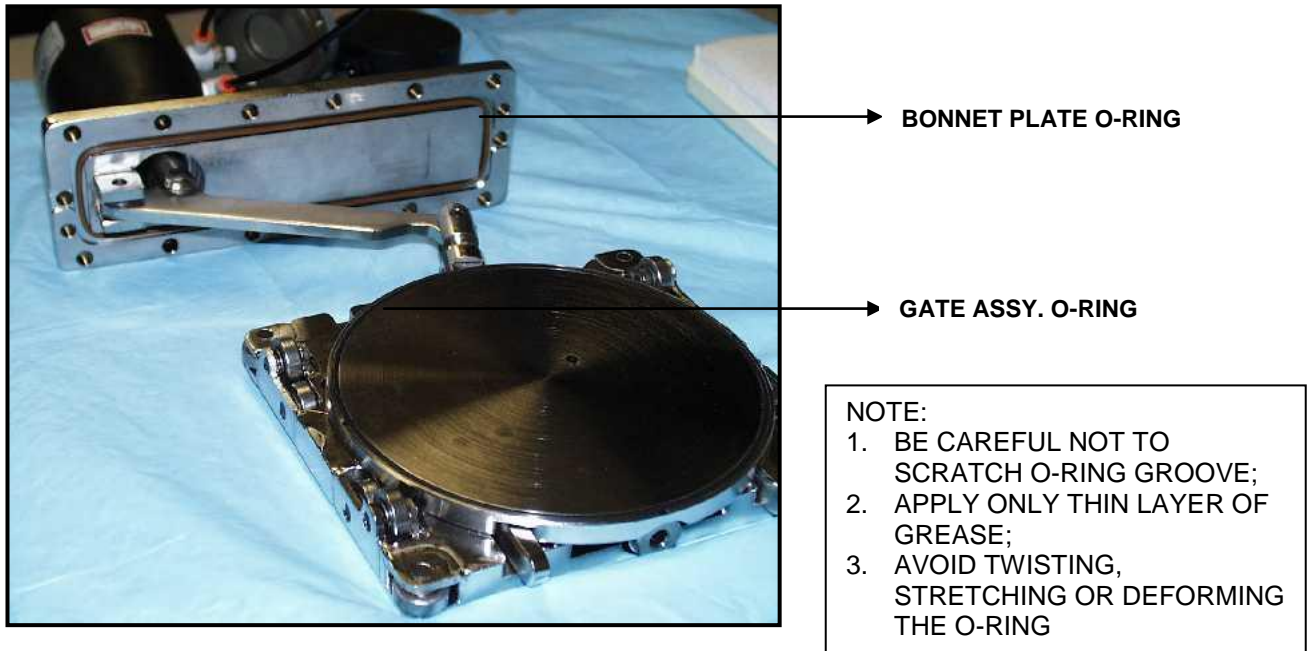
GATE O-RING AND BONNET PLATE O-RING
